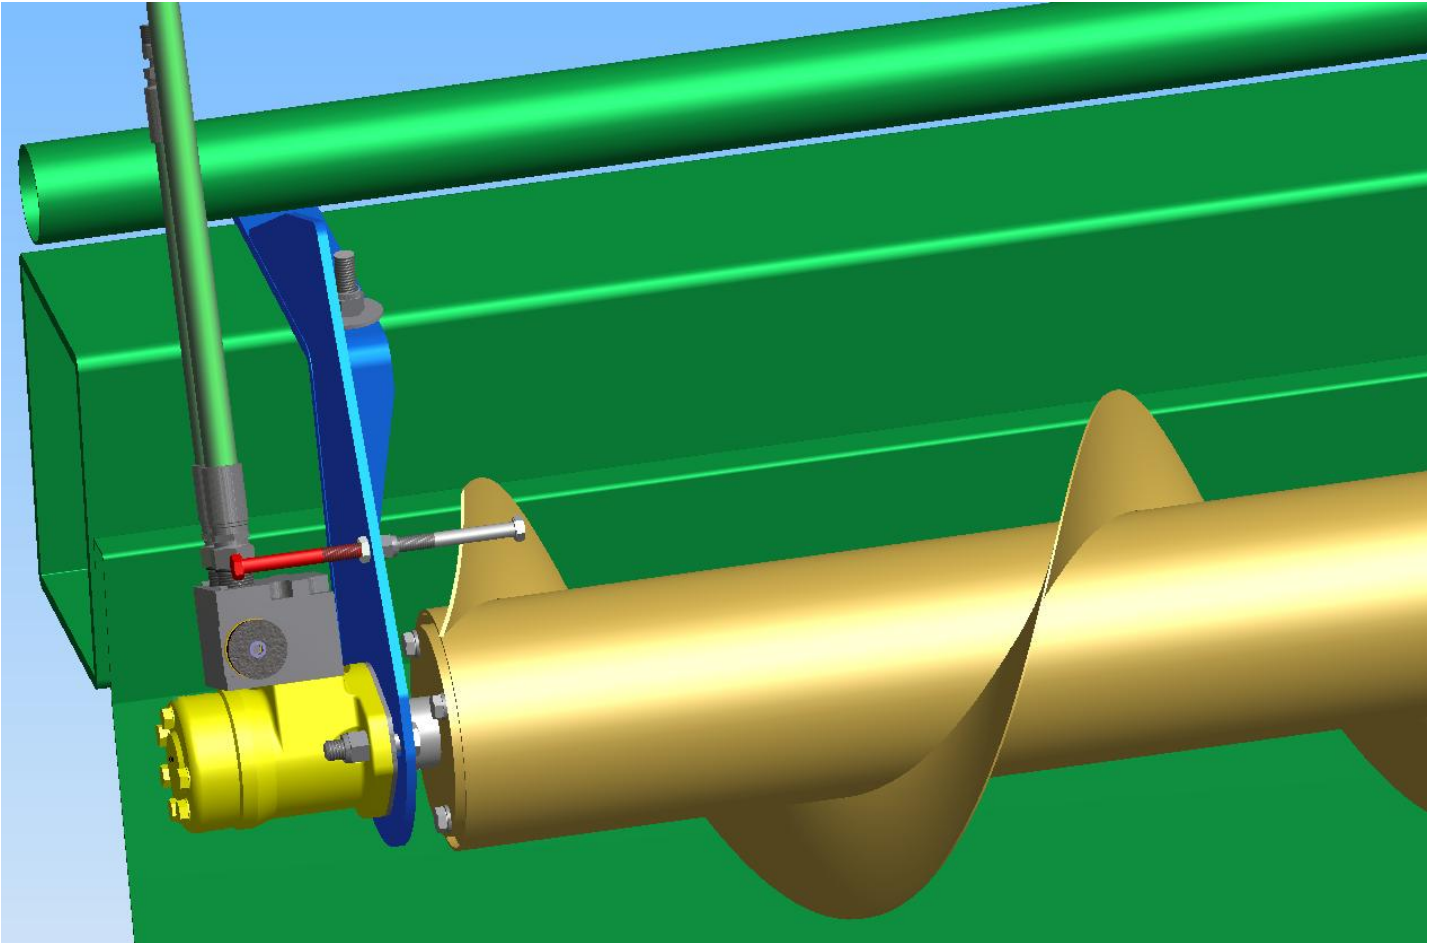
RH END FRONT VIEW OF DIRECT DRIVE MOTOR AND AUGER MOUNT
